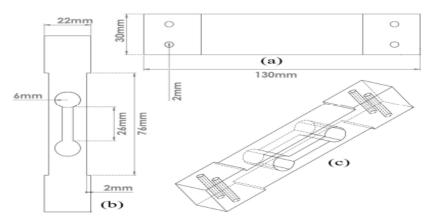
Orthographic drawing of single load-cell, (a) top (b) side and (c) 3D projected view.
